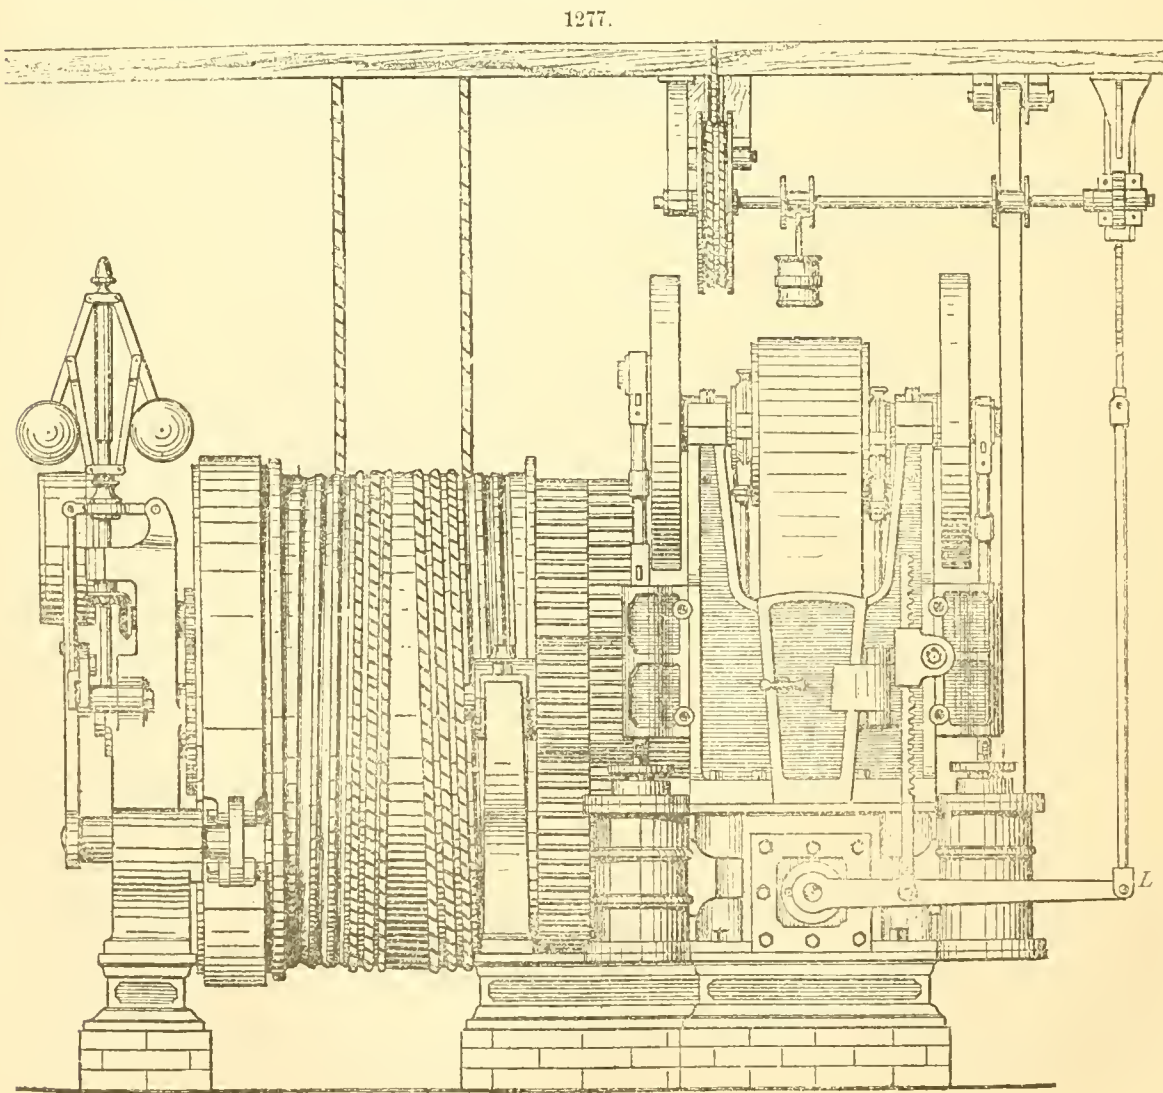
is an end and Fig. 1278 is a side view of the hoisting engine for the Otis elevator. *L* is the starting lever connected with the hand-rope. This machine works entirely through gear-wheels, which are apt to be more durable than worms and worm-wheels.
